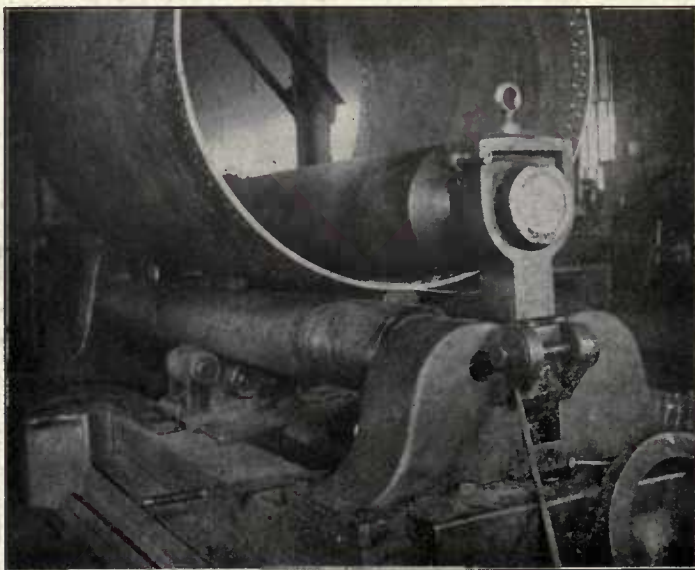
Power Rolls for Flanging Conical Connection Sheet of Boiler Shell.
